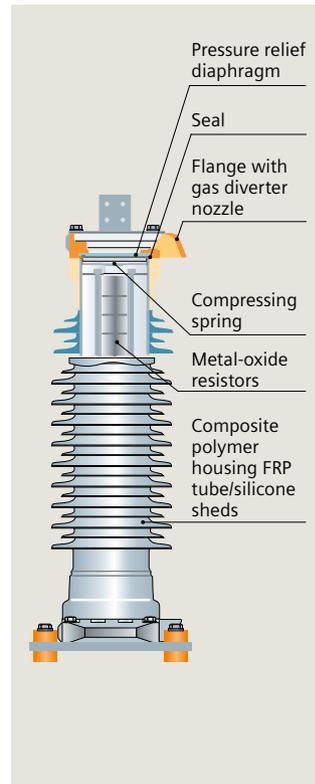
Cross section of a polymer-housed arrester in tube design
